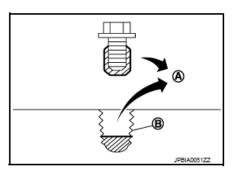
Removing Liquid Gasket From Bolt Hole And Thread Courtesy of NISSAN NORTH AMERICA, INC.
